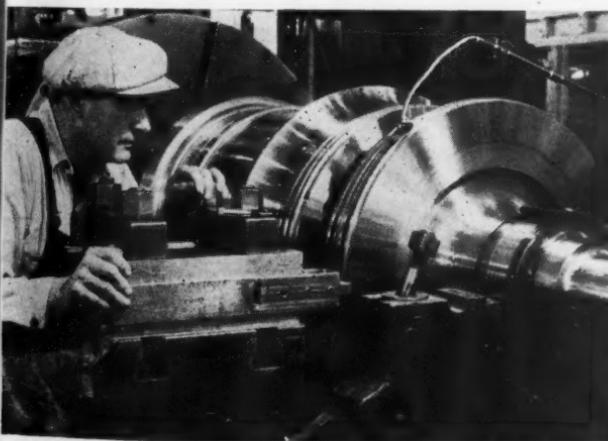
To Cut Blade-Ring Grooves, the Tools are Set Upside Down and the Lathe Spindle is Operated in Reverse Direction
